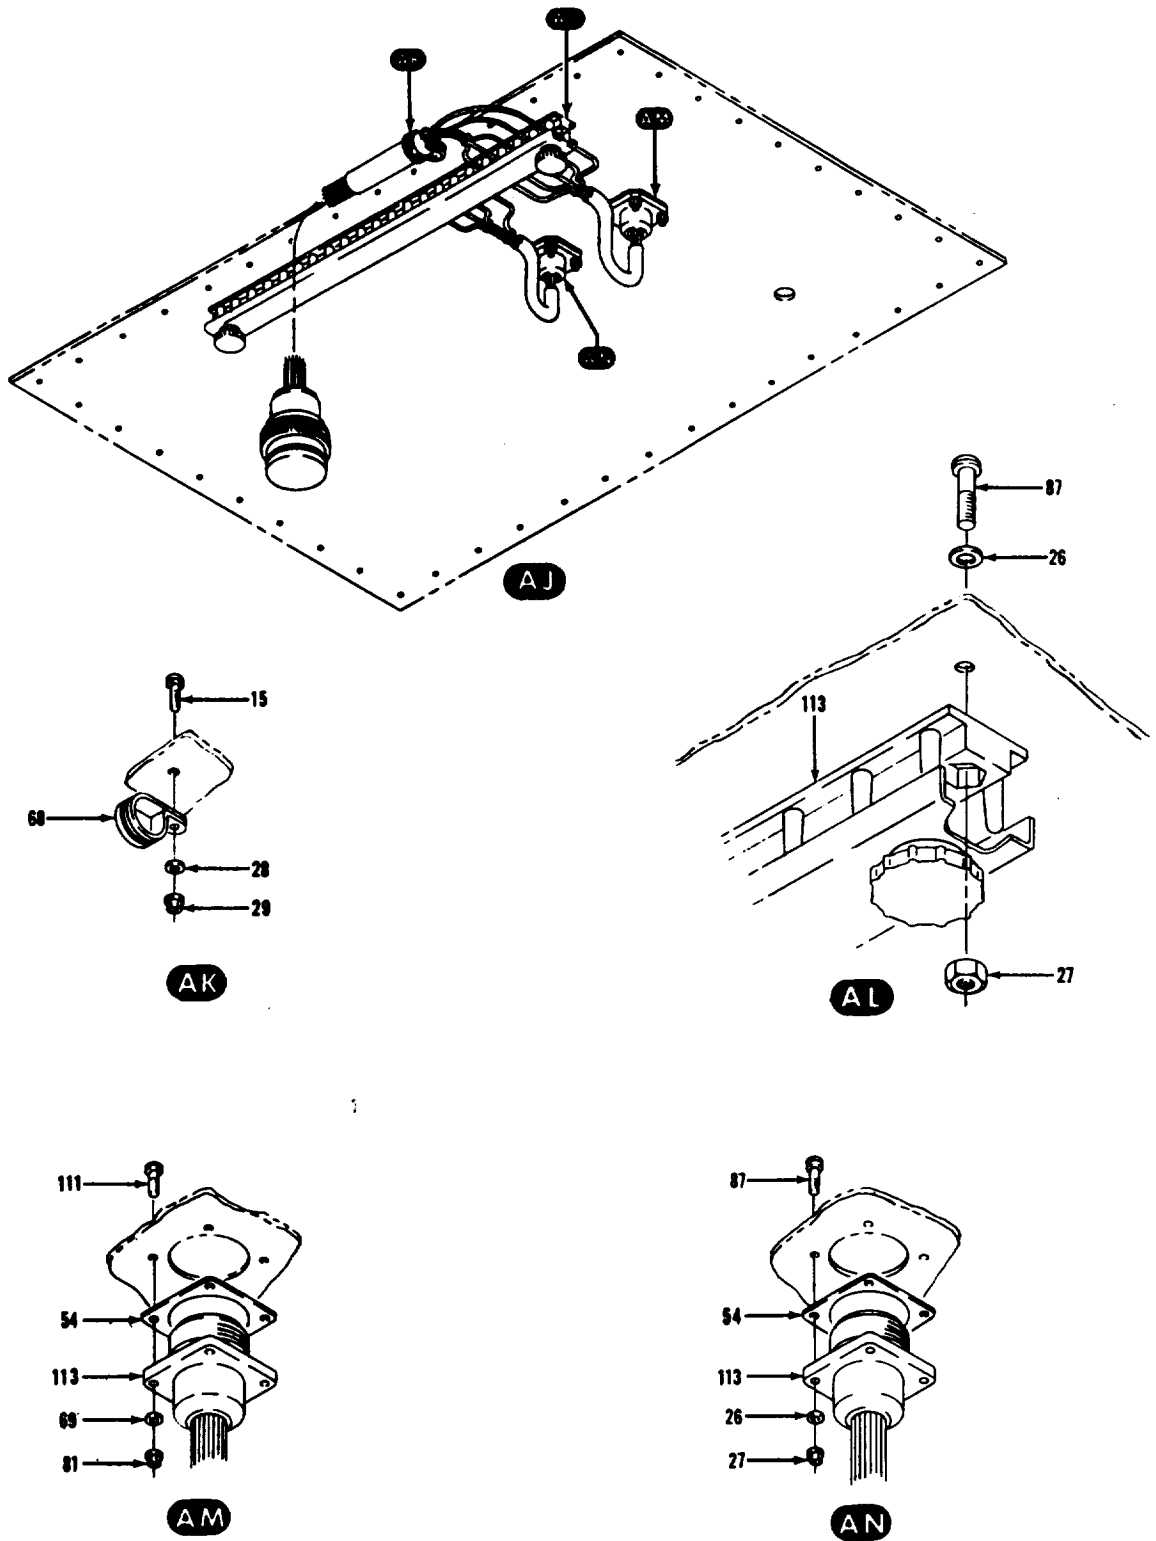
Electrical Equipment Installation (Sheet 12 of 19)
